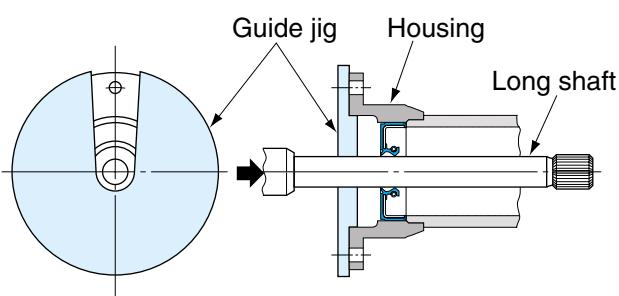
Guide jig for inserting of long shaft into seal bore
